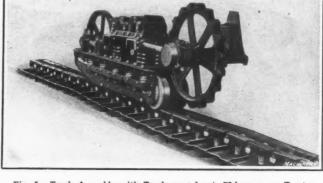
Track Assembly with Track opened out, 75-horsepower Tractor
